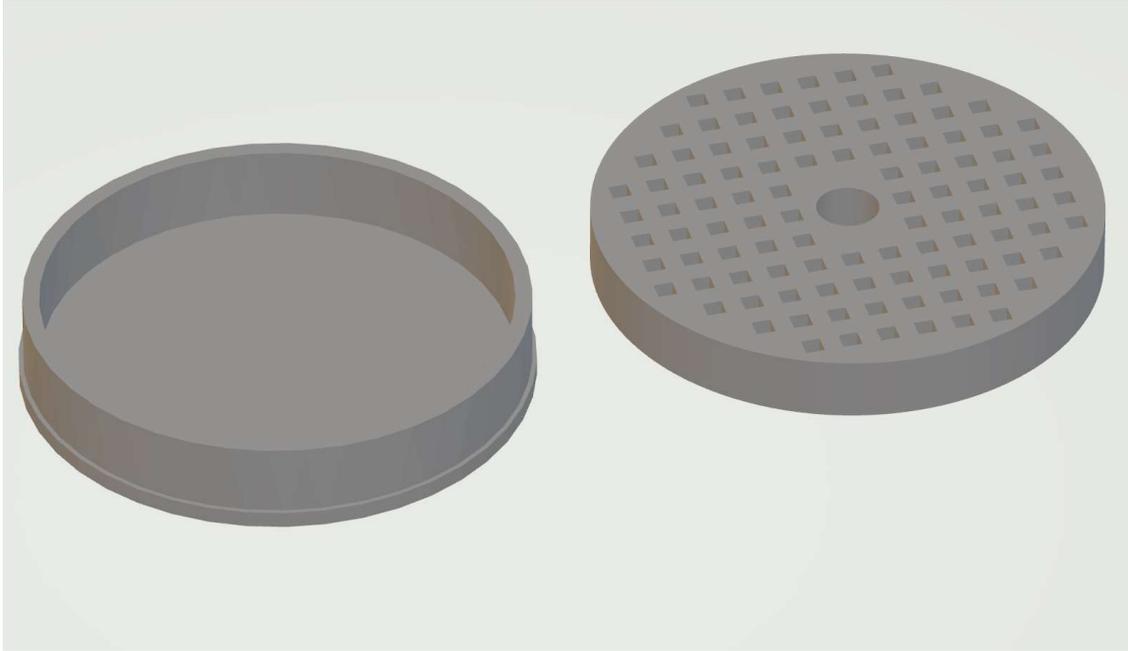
D Printed distributor tool designed and printed at Cardiff University's School of Engineering (Selective laser sintering). The inlet fitting in the centre (A) was threaded post-printing and fitted with a threaded-to-tube adapter (6mm, RS Stock No. 176-1404) for intrusion of leachate. The side length of each square (B) in the mesh was 0.18cm.
